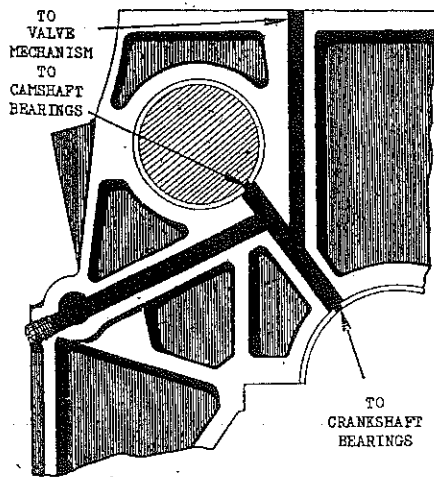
Oil holes in bearings must line up with oil feed holes in crankcase on all engines. Illustration shows 278, 308, 361, 426, 451 and 477 engines
